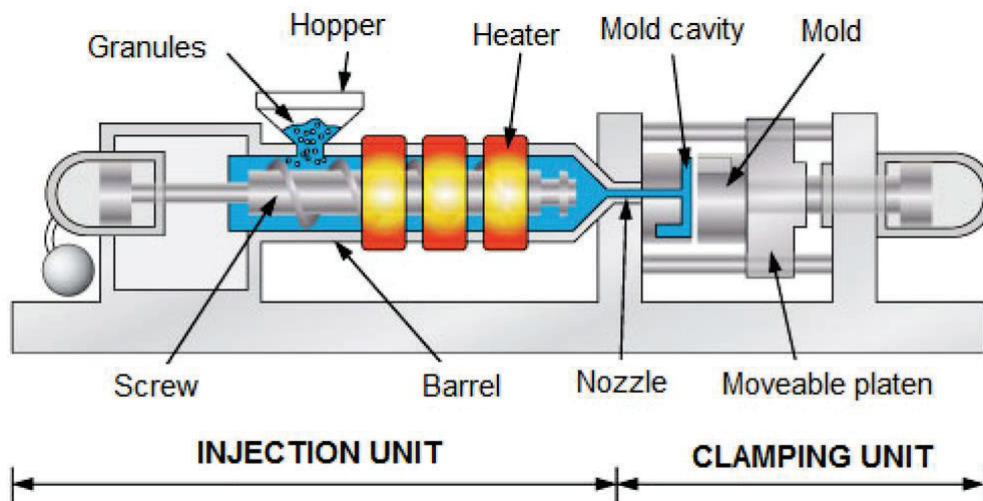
Injection molding technique. Courtesy of Svečko (2013) [28], used with permission.
